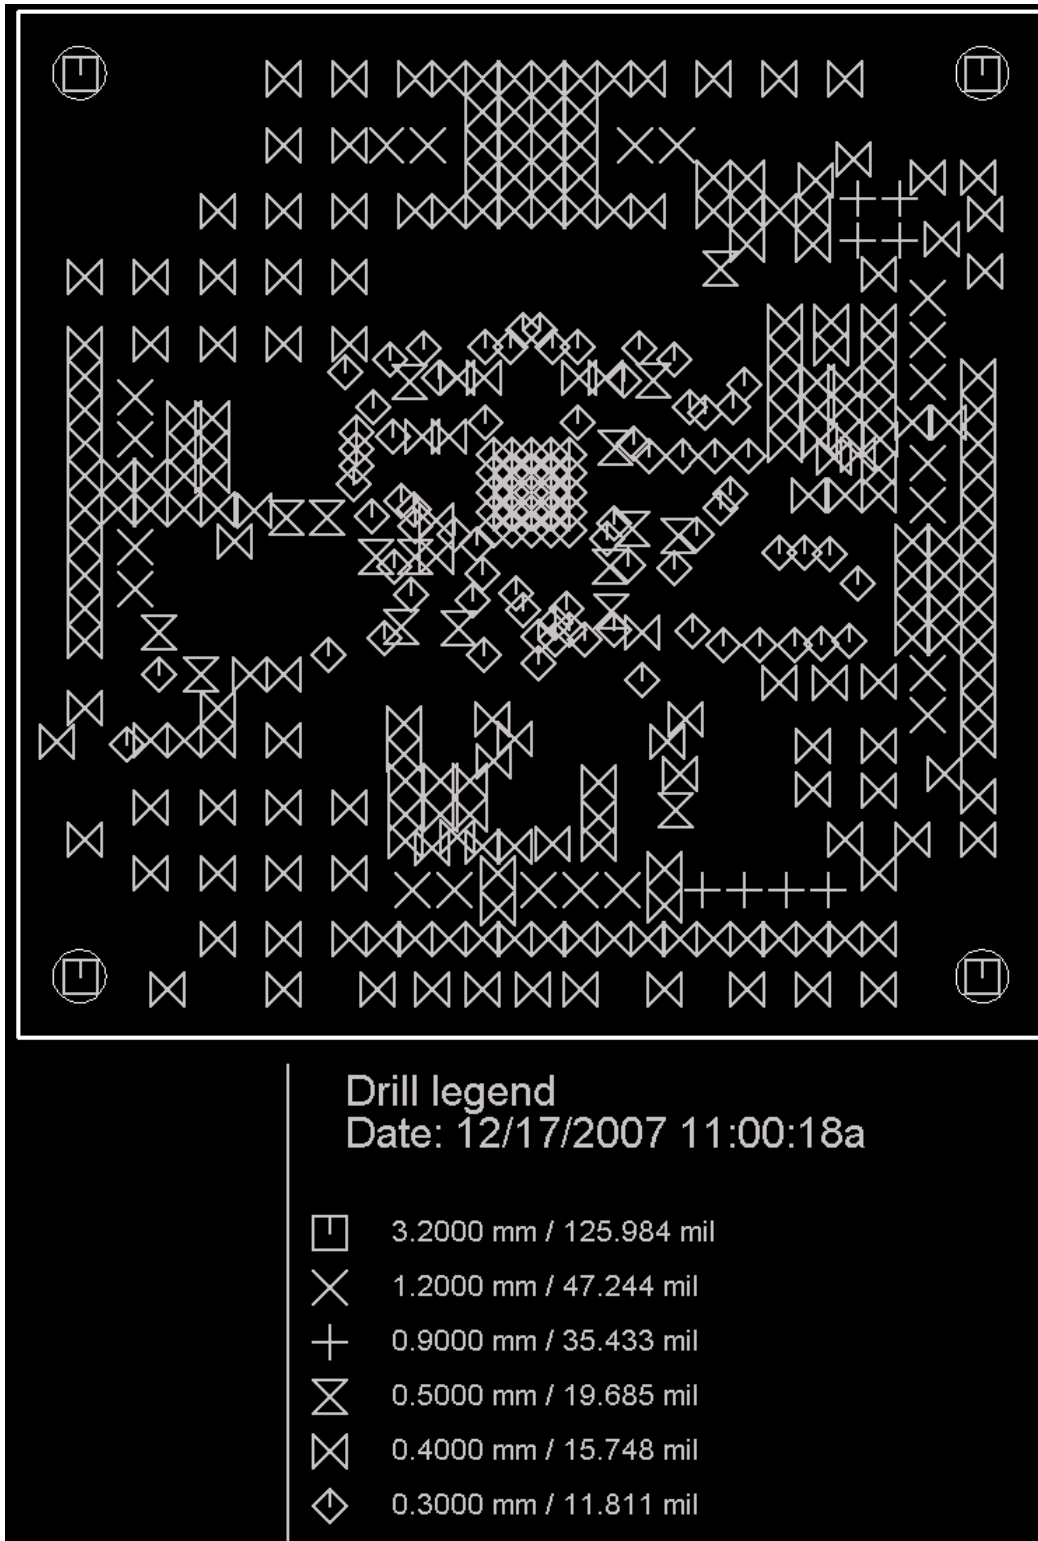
KIT34704AEPEVBE Fabrication Drawing
